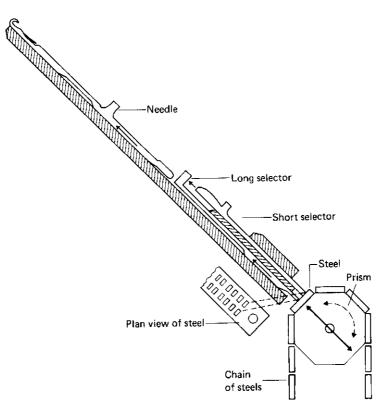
Mechanical jacquard selection on a V-bed flat machine.
